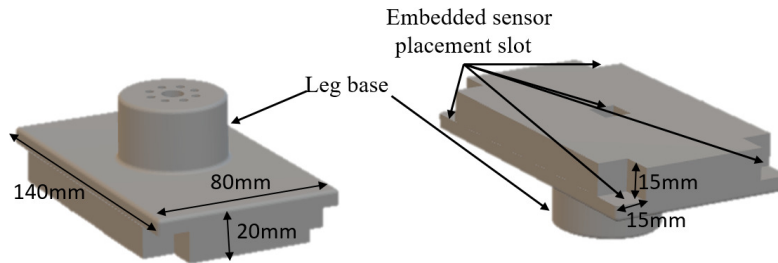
CAD design of foot skeleton before casting with elastomer, isometric view(left) and vertically flipped isometric view(right).
